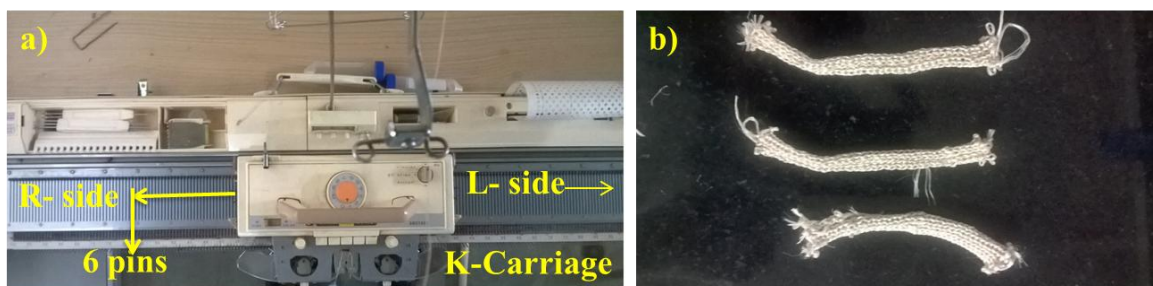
a) Knitting Machine b) Knitted Silk fibres
